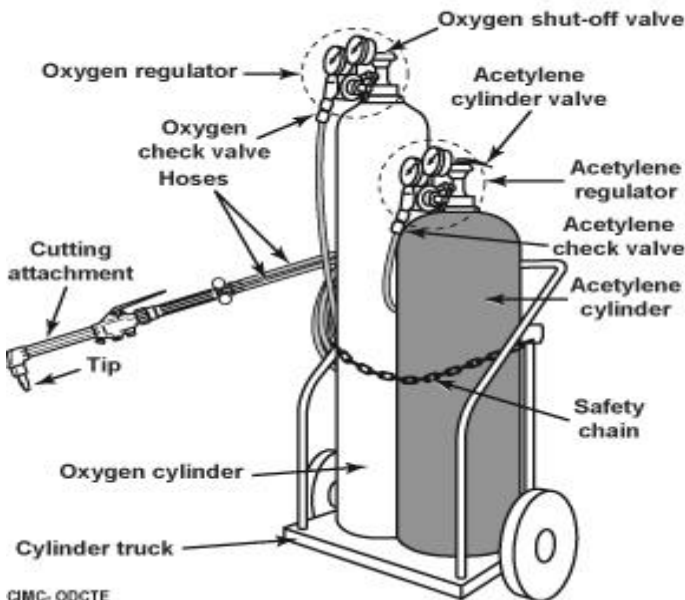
ASSEMBLY/PARTS OF GAS (OXY-ACETYLENE) WELDING
